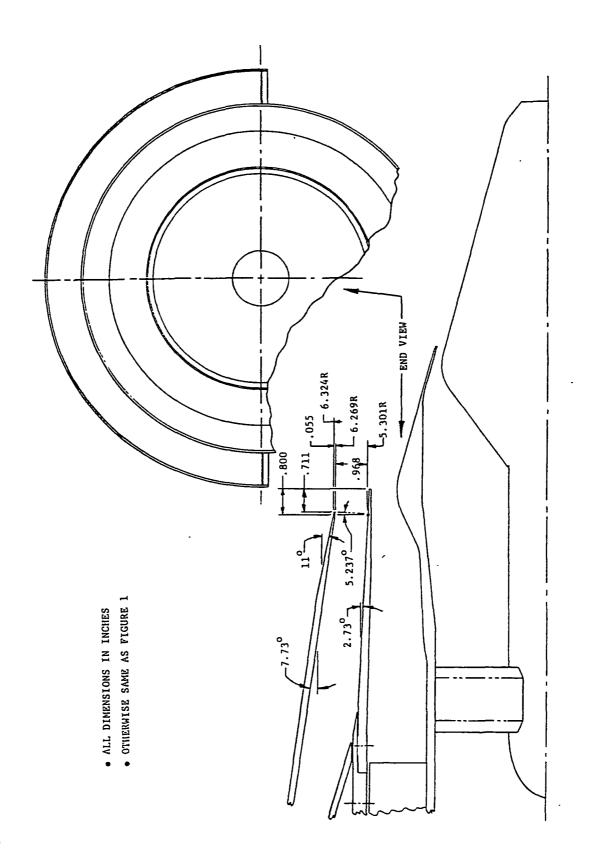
SCHEMATIC OF UNSUPPRESSED COANNULAR PLUG NOZZLE WITH 360° SHIELD, CONFIGURATION TAS-14.
